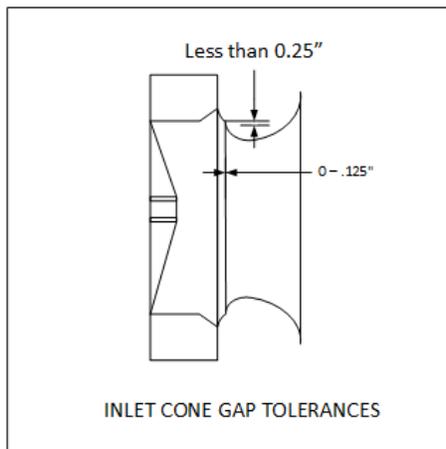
Supply Fan Inlet Cone Tolerances
